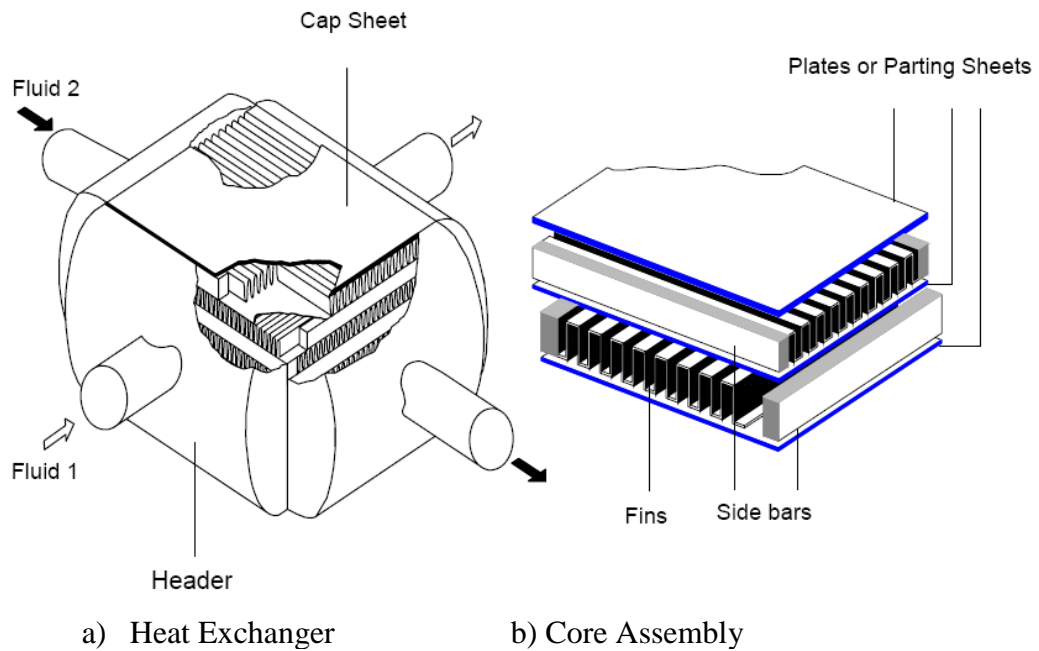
Plate Fin Heat Exchanger Assembly
